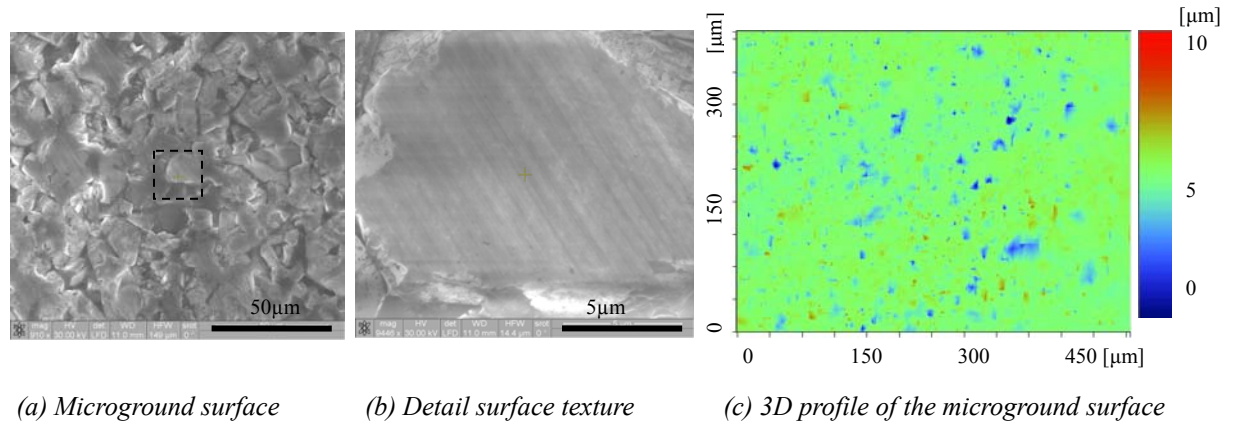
Fracture and ductile regions on a microground alumina workpiece
